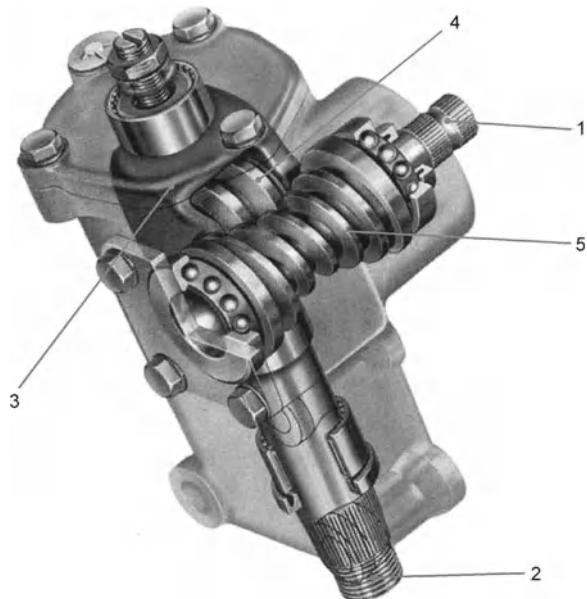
Screw and sector steering box, to decrease mechanical friction a globoid screw is used. 1 Steering column; 2 spline shaft; 3 fork; 4 threaded roller; 5 globoid screw (from Genta and Morello 2009)
